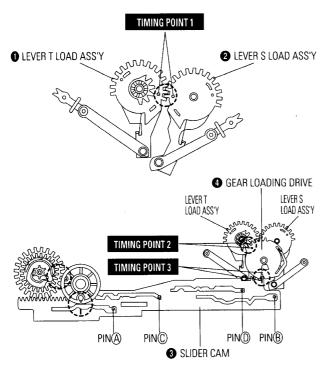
Assembly of Gear Loading Drive, Slider Cam, Lever T, S Load Ass'y
